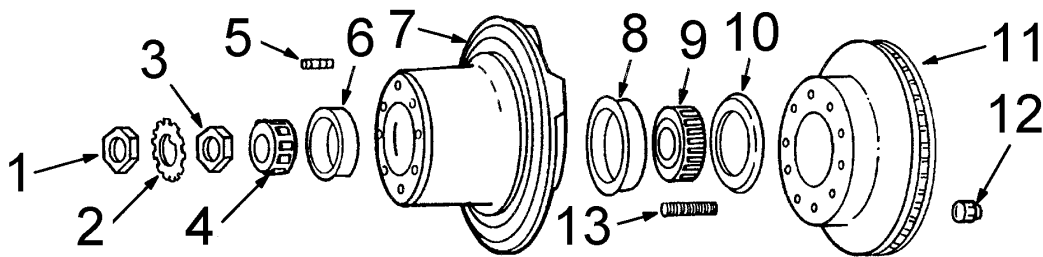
Remove Rear Rotor And Wheel Hub Assembly
